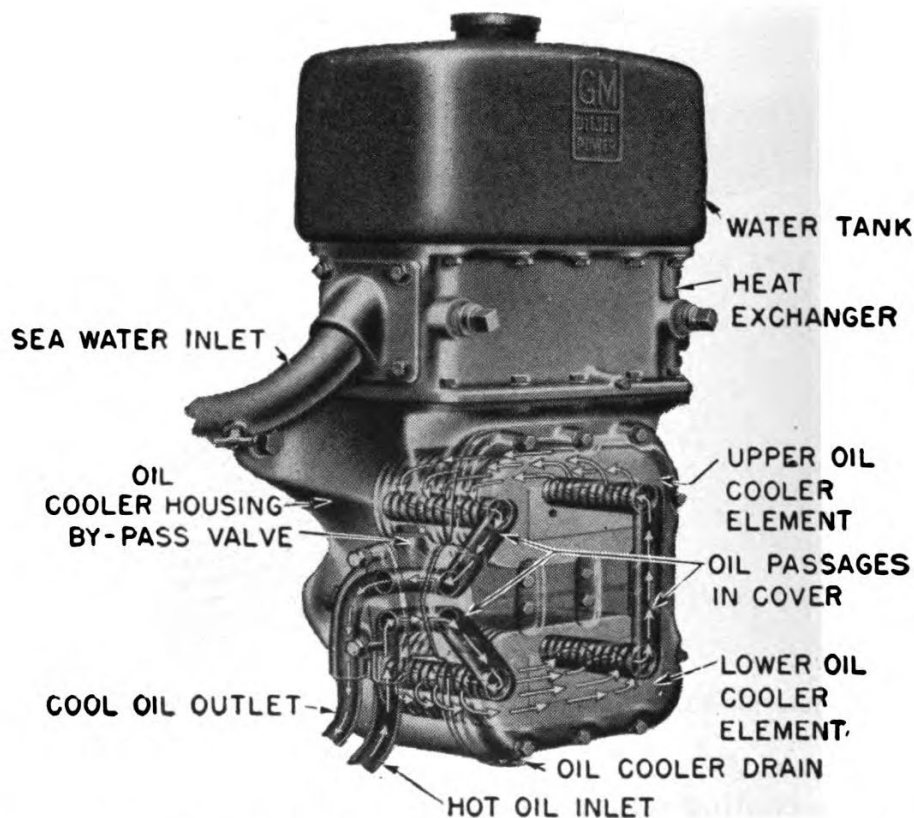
Location of coolers and other cooling-system components of GM series 71 engines.
